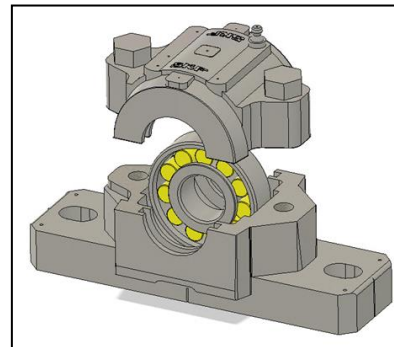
3D CAD assembly of the bearing and split pillow housing.
